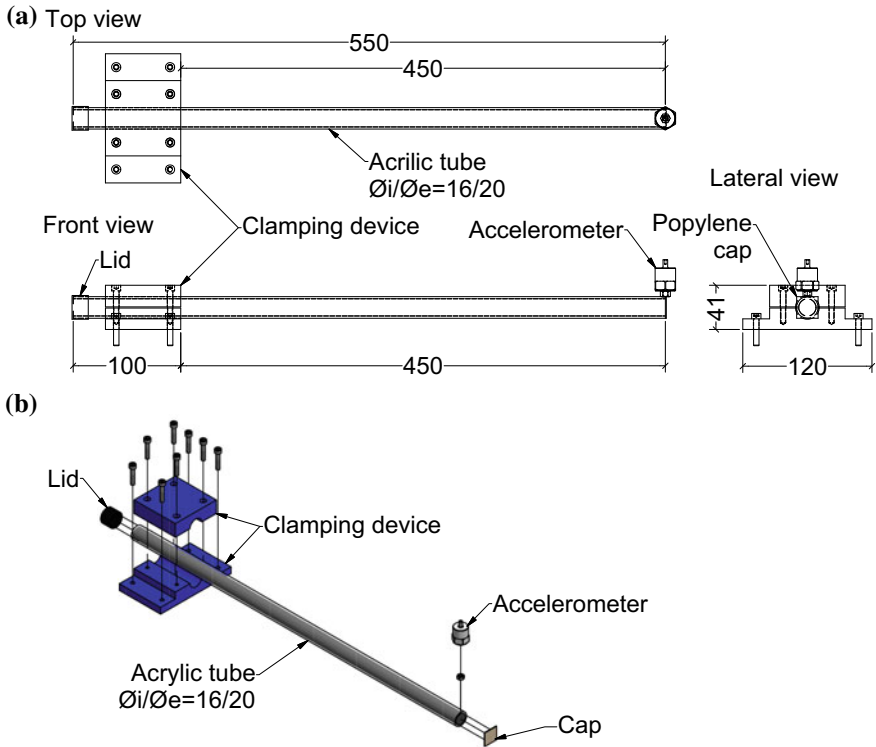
EMM-ARM final assembly for cement pastes tests: a scheme; b 3D exploded view (units: mm)
